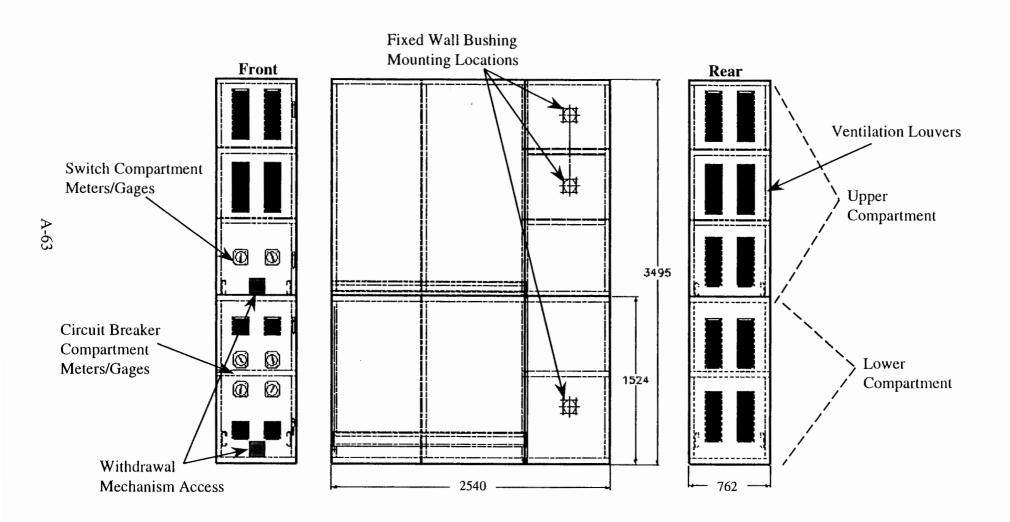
24 kV Switchgear Enclosure Arrangement (Feeder Cubicle-Circuit Breaker side shown)
